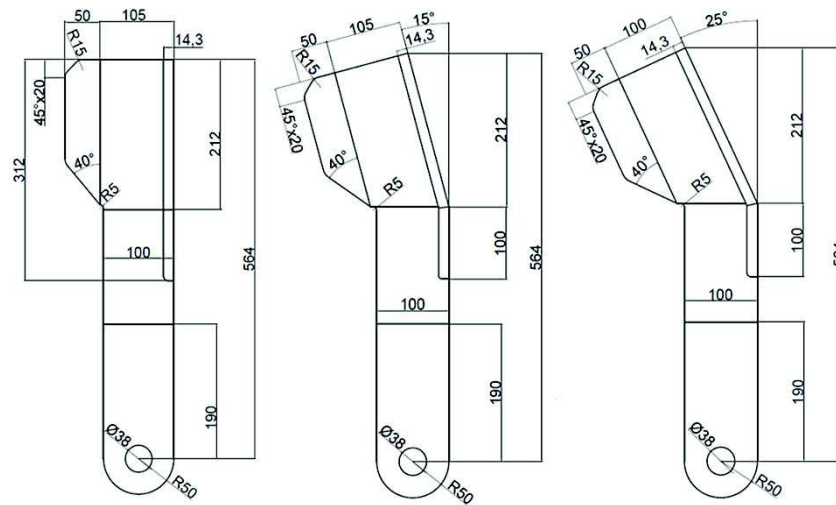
Proposed cutting tools with different rake angle (from left: 0°, 15°, 25°; dimensions in mm).
